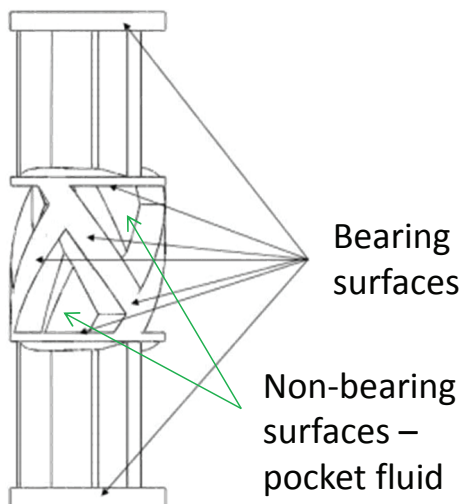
Valve bearing surface and pocket fluid, account for equivalent bearing surface
